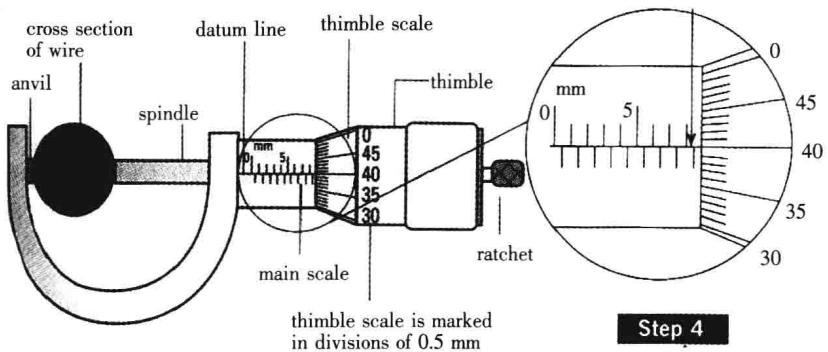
Using the micrometer screw gauge to measure the diameter
